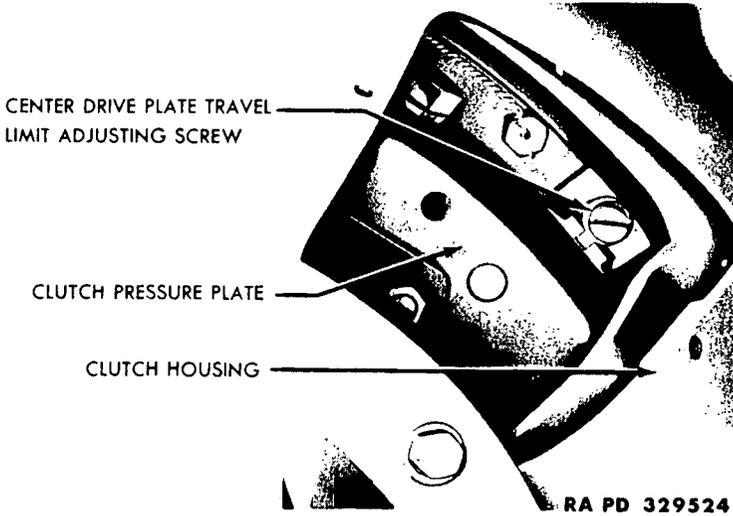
Inspection Plate Removed From Left Side of Clutch Housing
